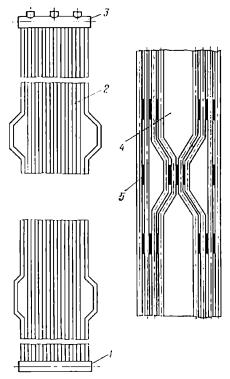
Section of a curtain wall (platen) 1—lower header; 2—tubes; 3—upper header; 4—windows; 5—points of tube welding
